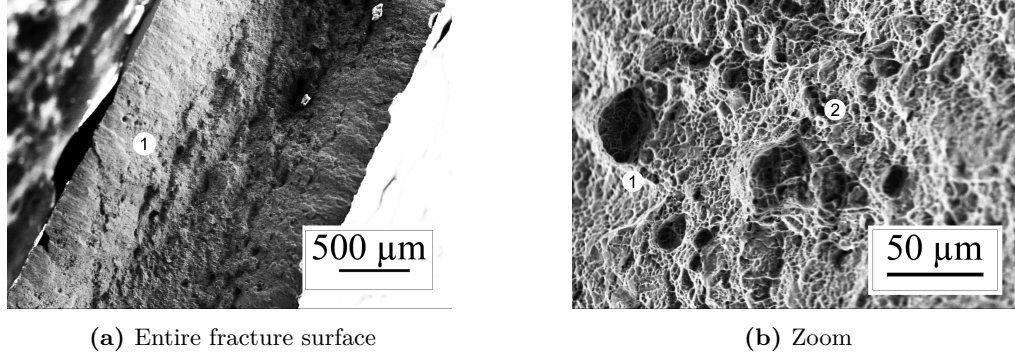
Fractographies of notched samples made of TA6V: (a) entire fracture surface; (b) a zoom reveals larger voids (1) and dimples (2).
